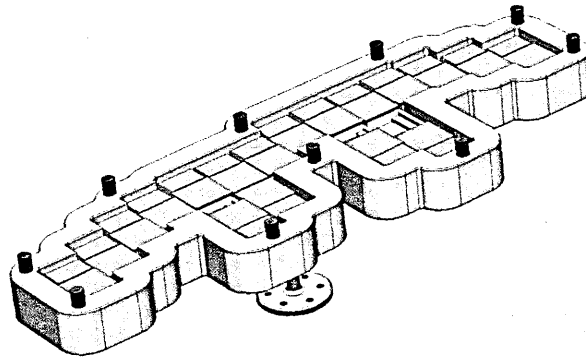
CAD drawing of OP-XGS CCD array complete with shielding and cooling assembly [Murray, 2010].
